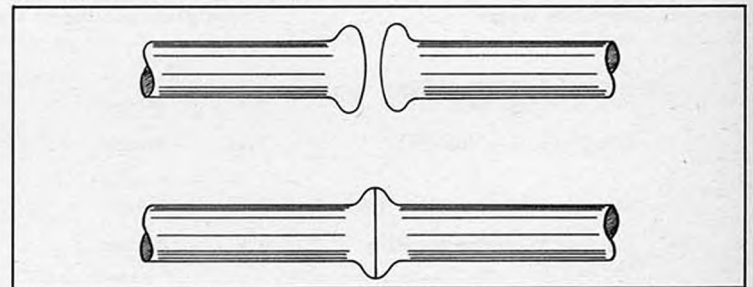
Butt Weld -- Ends Upset
